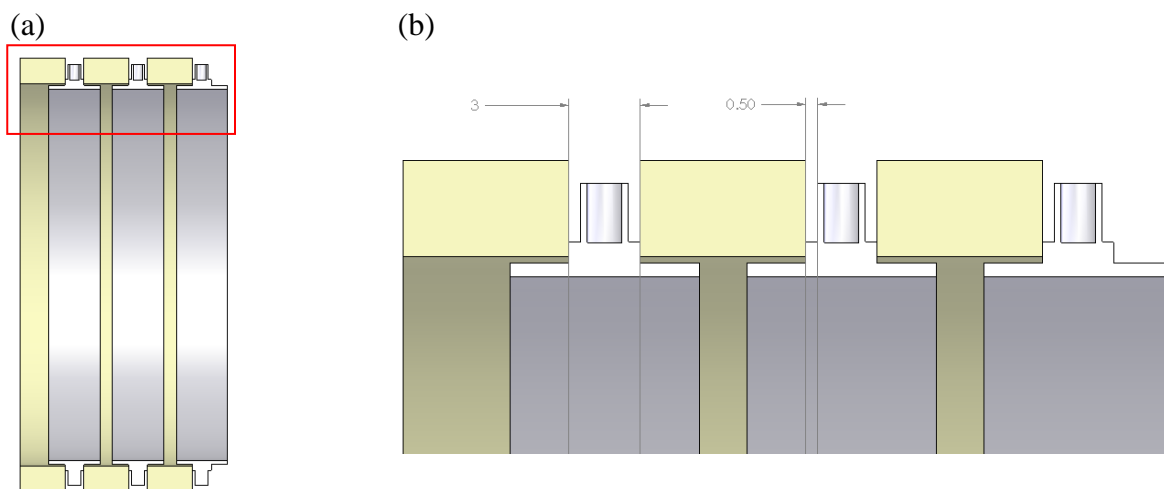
CAD drawings of (a) cross section of a stacked ring assembly consisting of three Alloy 46 electrodes (gray) and three ceramic insulator rings (tan) and (b) detailed view of the spacing of the drift rings that are highlighted by the red box shown in (a).
